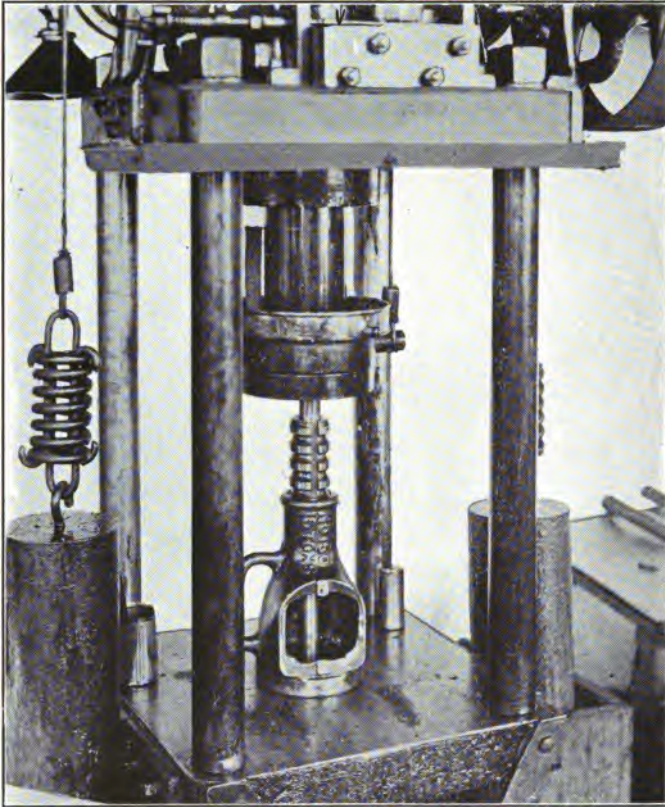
Broaching a guide bearing and solid key in jack base for ram.
